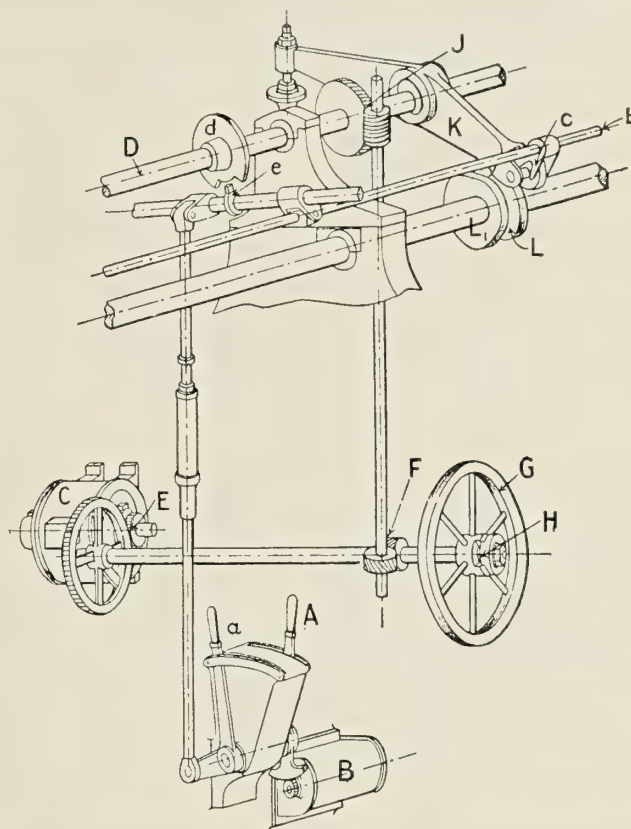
Diagrammatic Perspective Arrangement of Beardmore-Tosi Main Engine Starting and Reversing Gear
